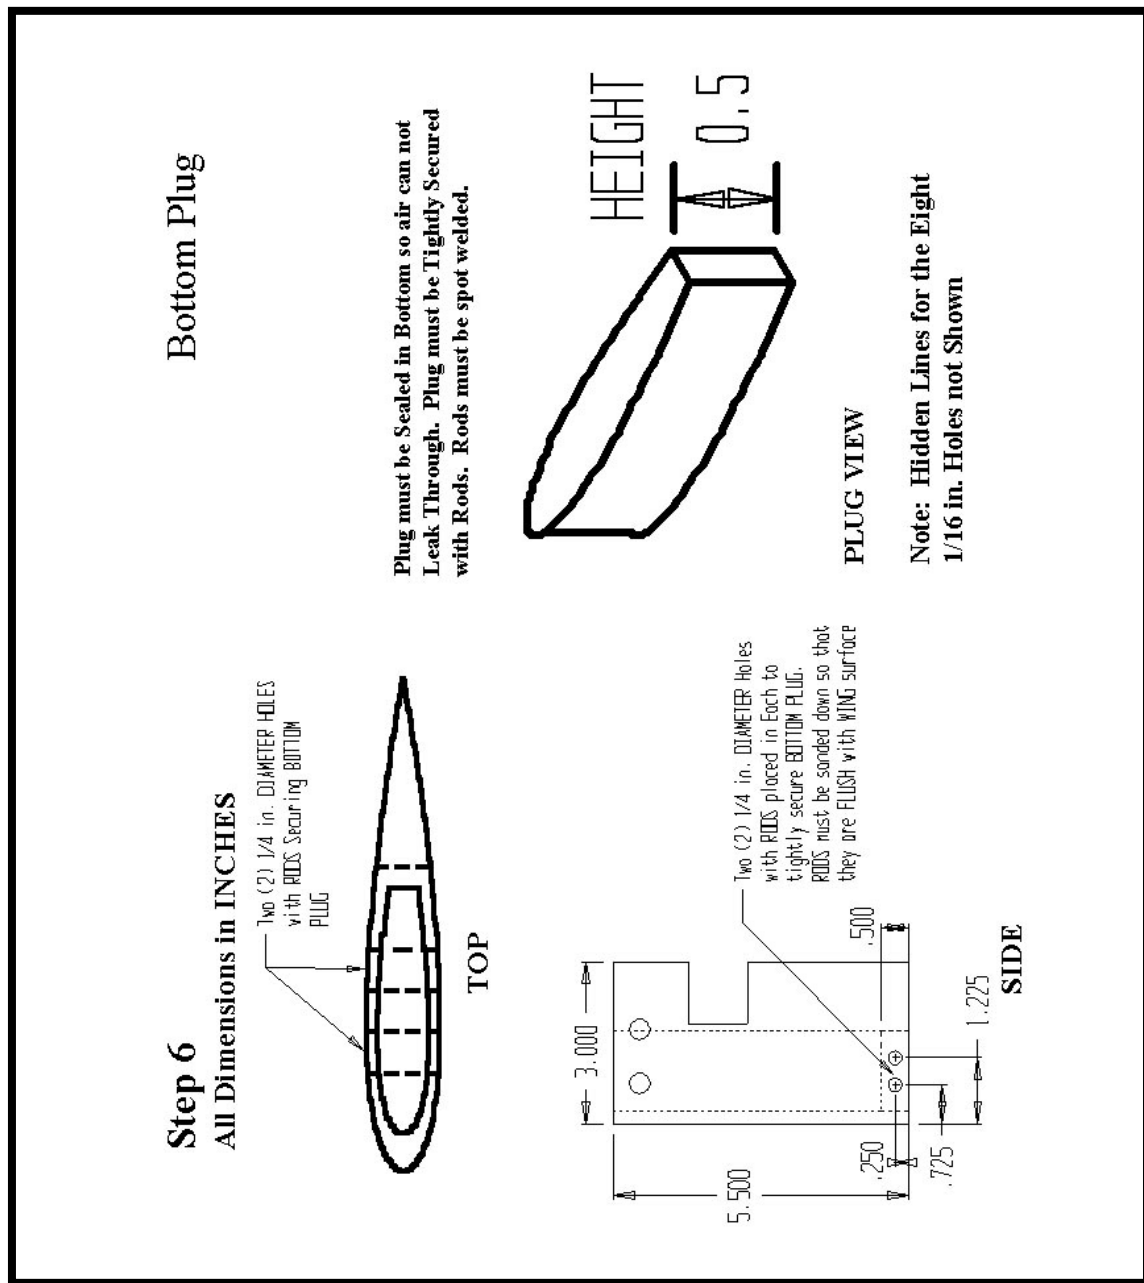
Modified IGV Design Step 6—Bottom Plenum Plug
